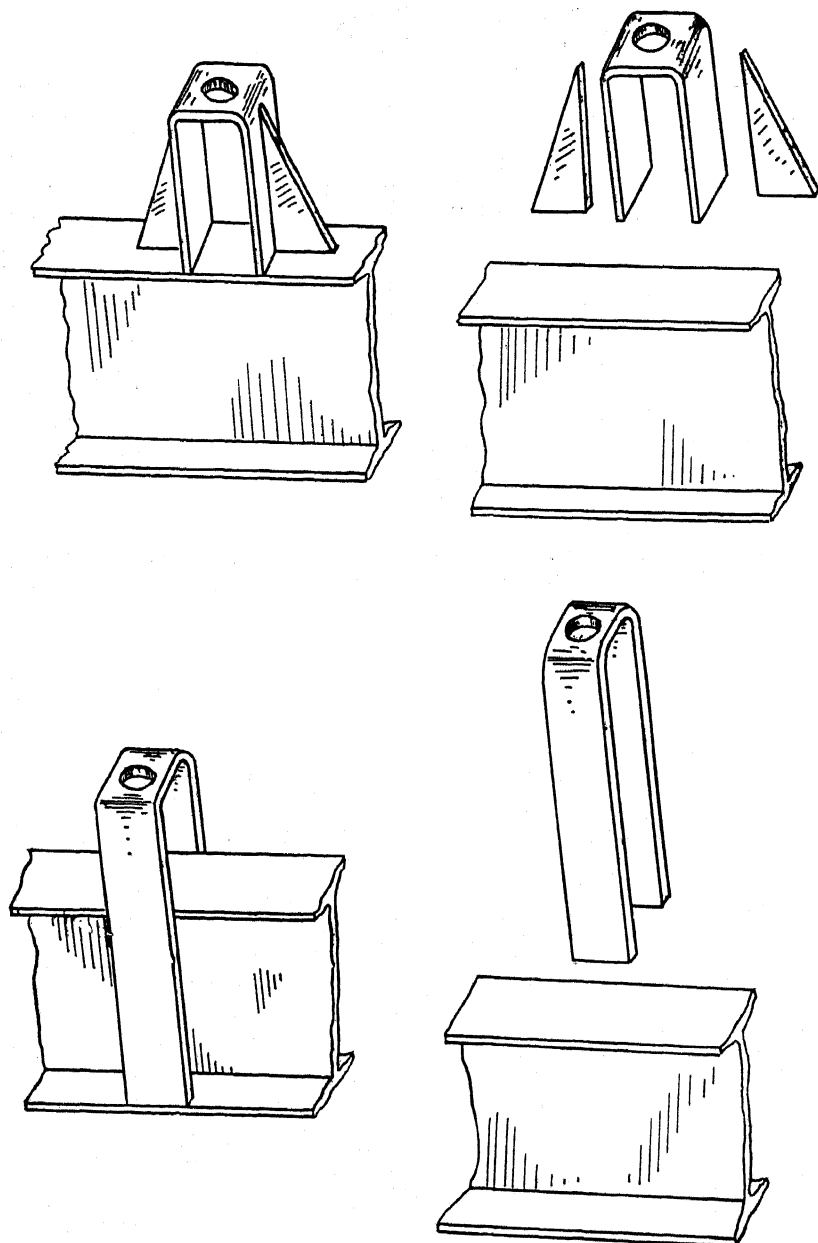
Two methods of attaching a link for a tension rod to an I beam. Both are extremely simple and neat in appearance.
